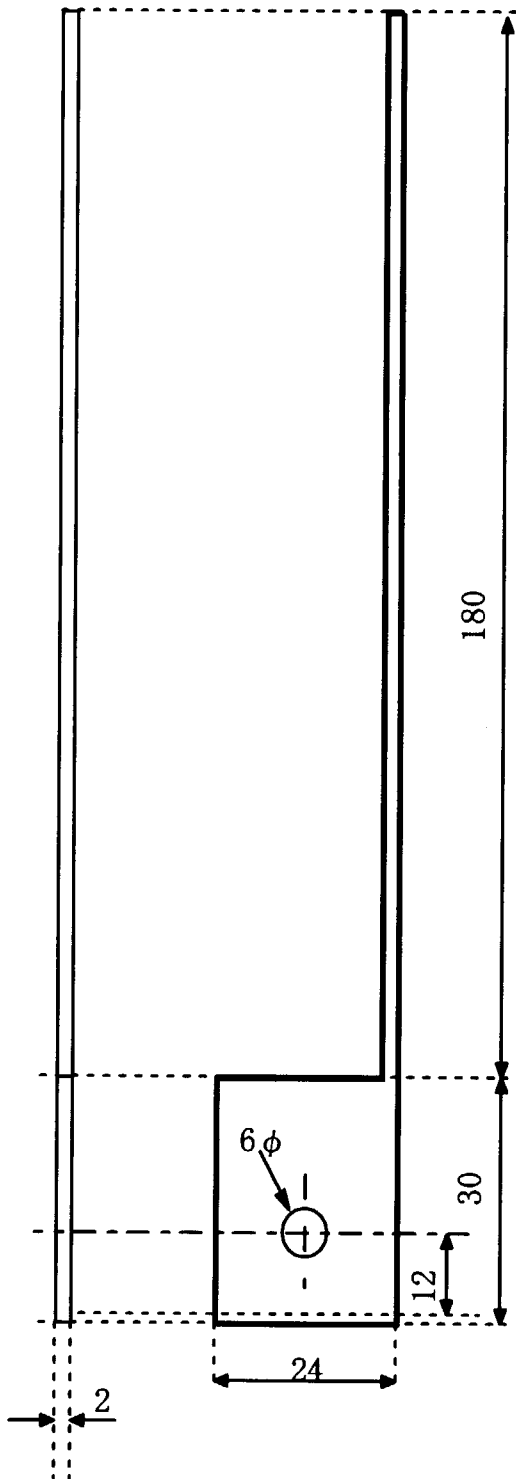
Flag-shaped test piece as a part of metal/metal-crevice made of SUS316L
